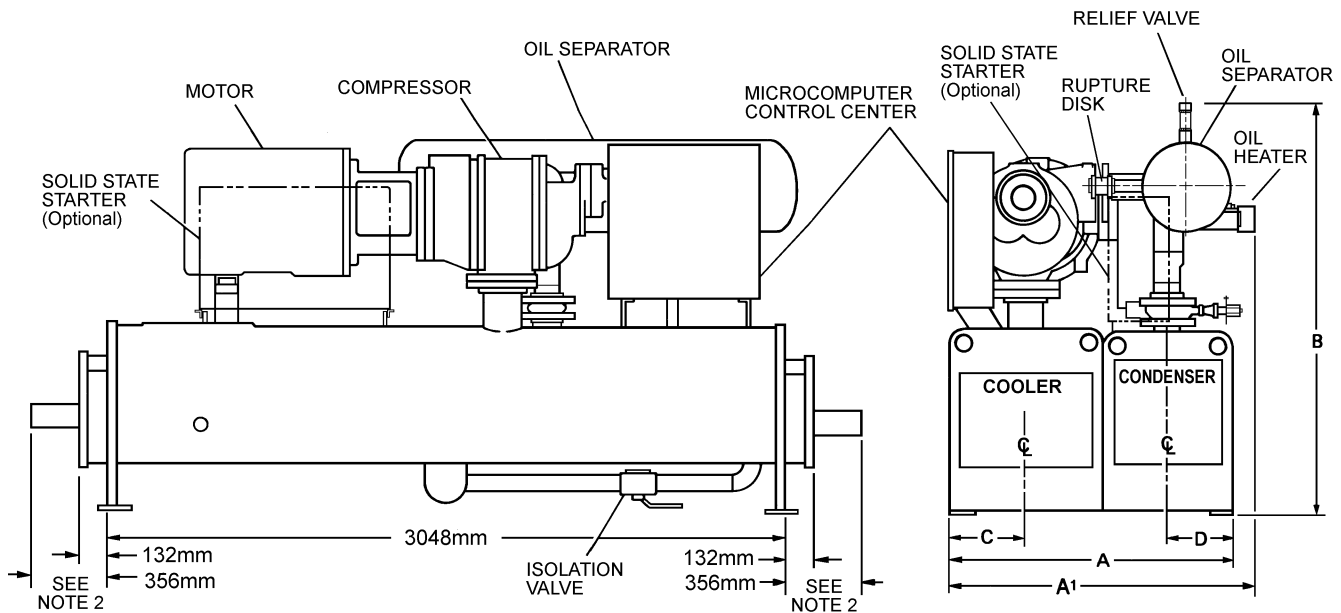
OVERALL DIMENSIONS - ENGLISH, S0 THRU S3 COMPRESSOR
